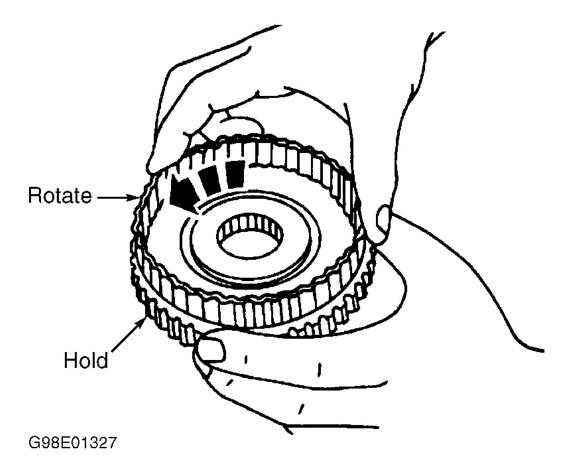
Identifying One-Way (Sprag) Clutch Rotation Courtesy of FORD MOTOR CO.
